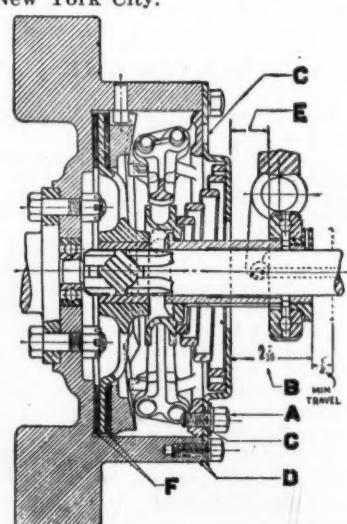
Sectional view of the Borg & Beck clutch used in the Liberty Six cars
